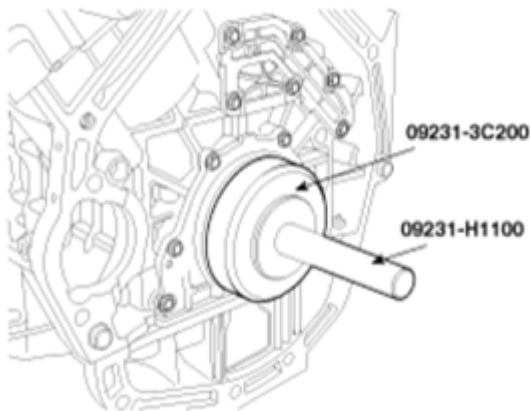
Installing Rear Oil Seal Using SST (09231-3C200, 09231-H1100)
